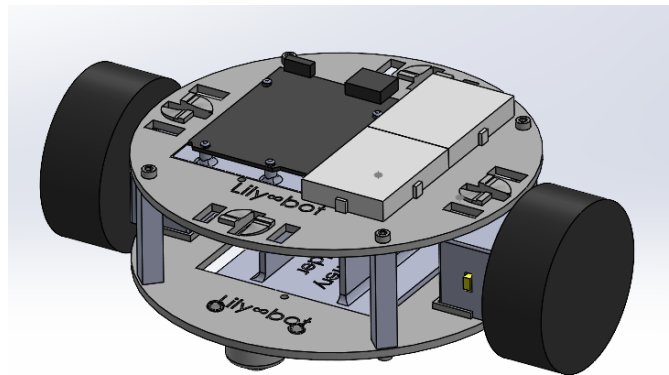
Two wheels attached to two DC motors on side of Lily $\infty$ Bot
